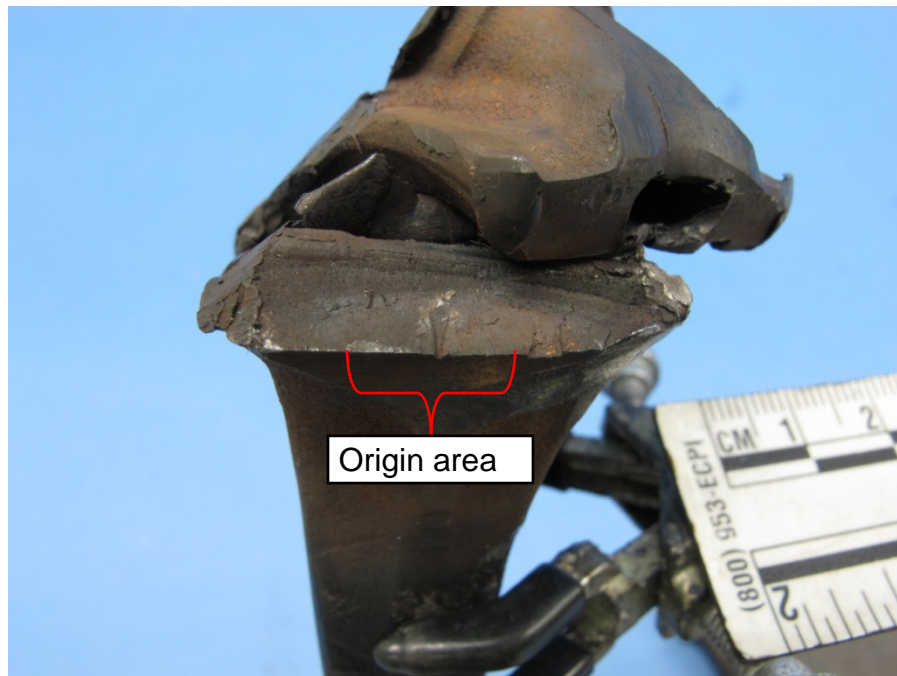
Damaged end of #2 cylinder connecting rod assembly exhibiting a flat fracture region and crack arrest fronts.
